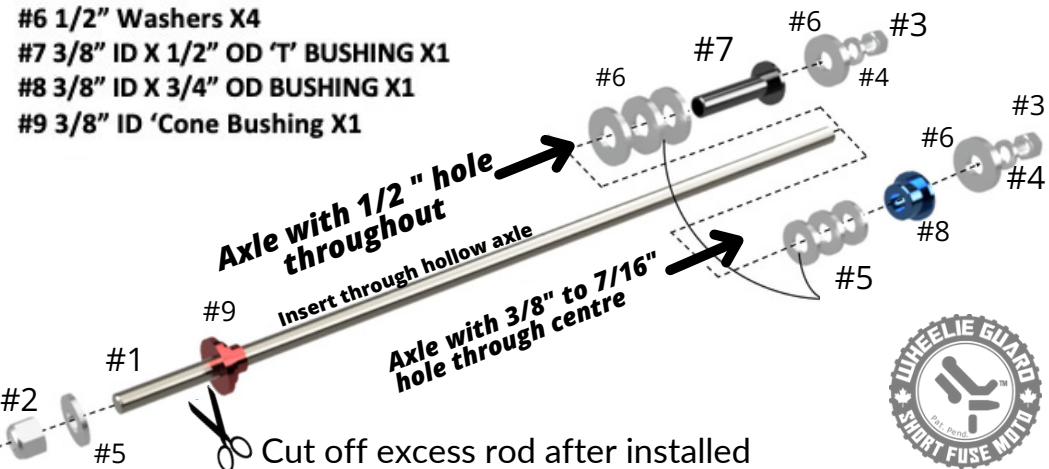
(B) - HOLLOW AXLE WITH 3/8" - 7/16" HOLE
